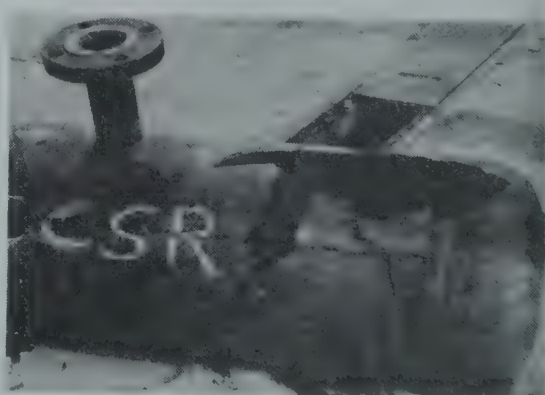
Vessel of Carbon Steel, A201, Welded with Carbon Steel Electrodes, Stress Relieved  $1200^{\circ}\text{F}$ , Tested at  $-320^{\circ}\text{F}$ , 1000 Ft Lb.
